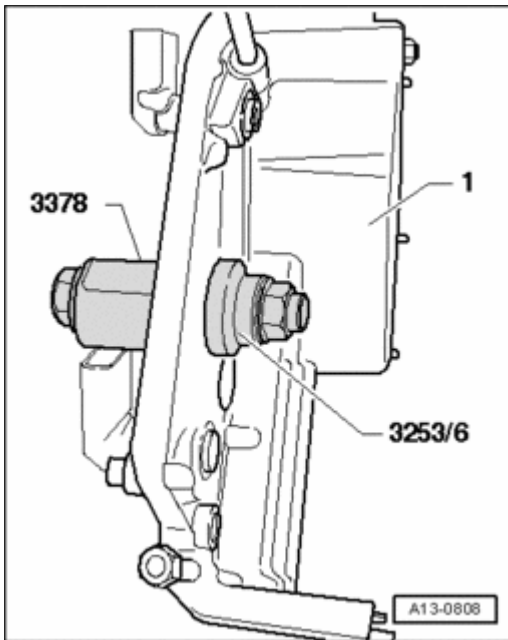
Inserting Oil Seal Into Upper Cover For Camshaft Timing Chain With Installation Sleeve 3378 And Use Assembly Tool 3253/6 To Press It In Flush
